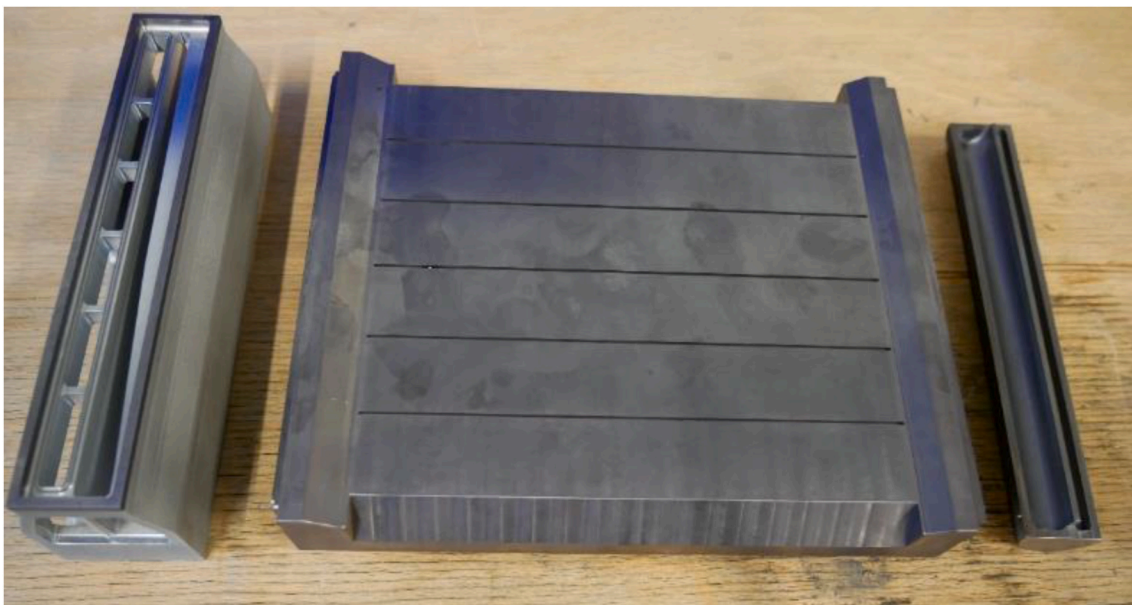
Machined parts prepared for electron beam welding. Left: Aluminum-Tantal bi-metal adapter, middle: main tantalum body, right: flow deflection
